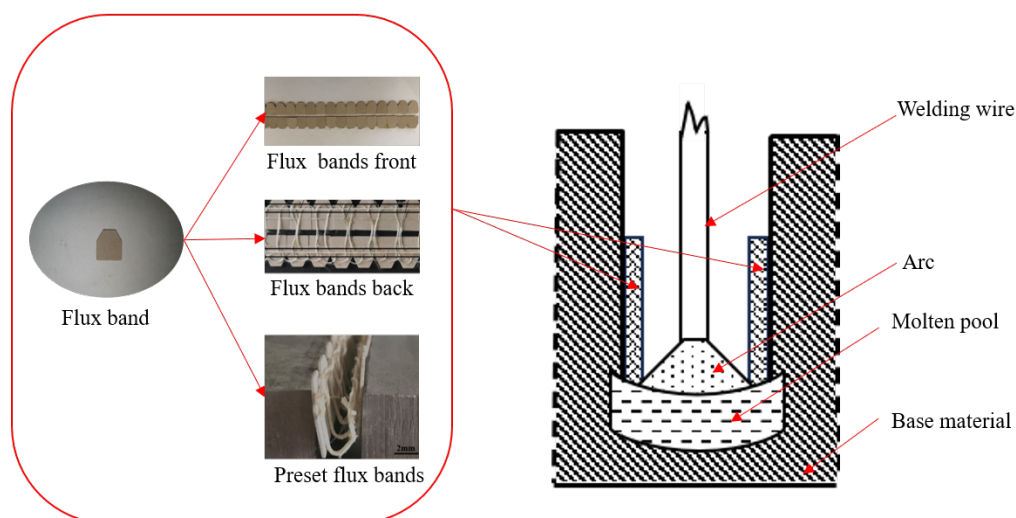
Schematic diagram of ultra-narrow gap welding
